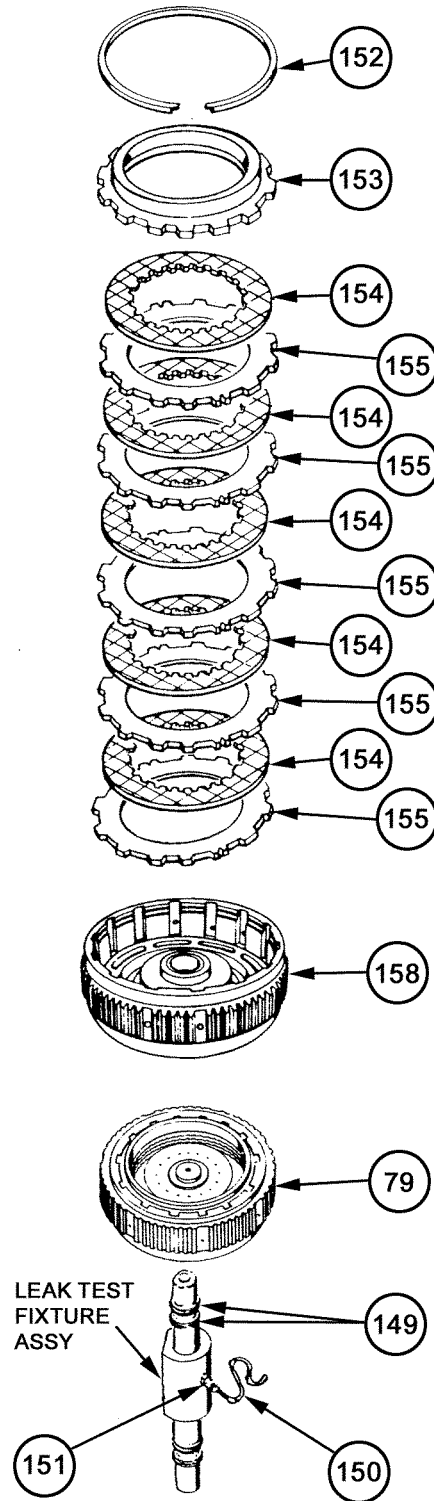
Fourth and Reverse Clutch Housing Assembly Components.
